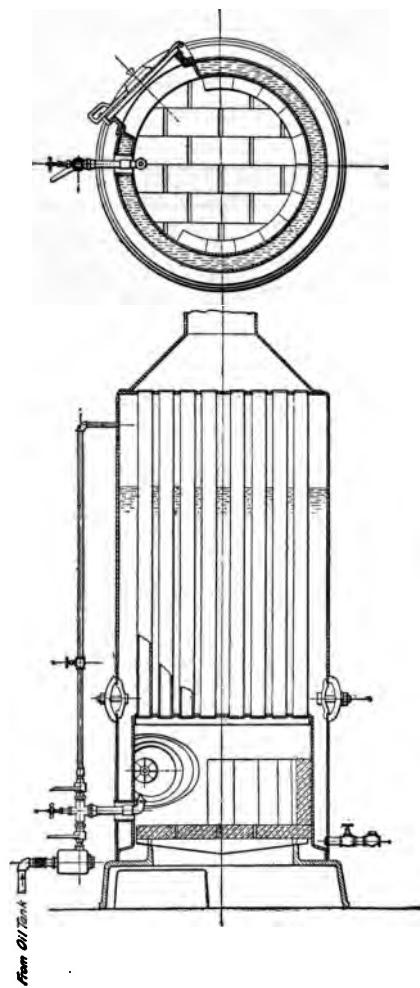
Wilgus Burner Arrangement for Upright Boiler.
